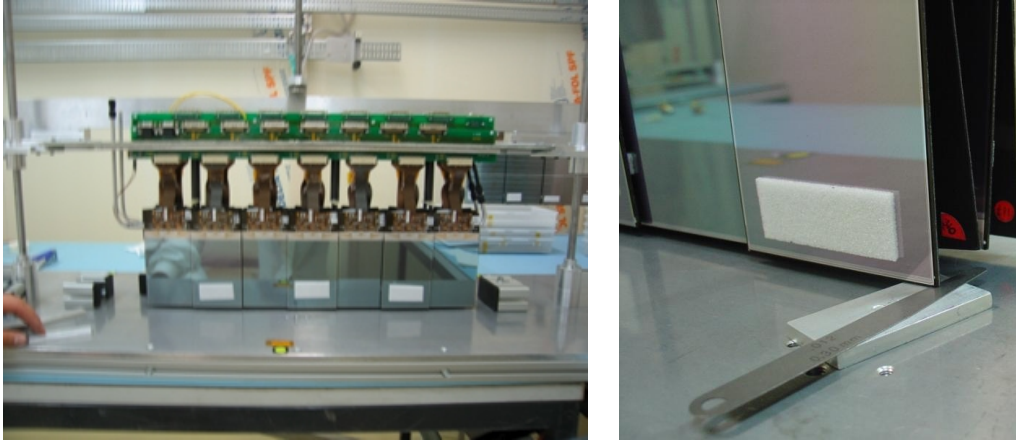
Resting on the dedicated stops, an assembly is ready for the test of the height of the sensor modules (*left*). On the right, one measures the distance, d , between the base plate and the bottom of the module supports, as shown on the drawing of Fig. 3.16, using a calibrated wedge and precision blades.
